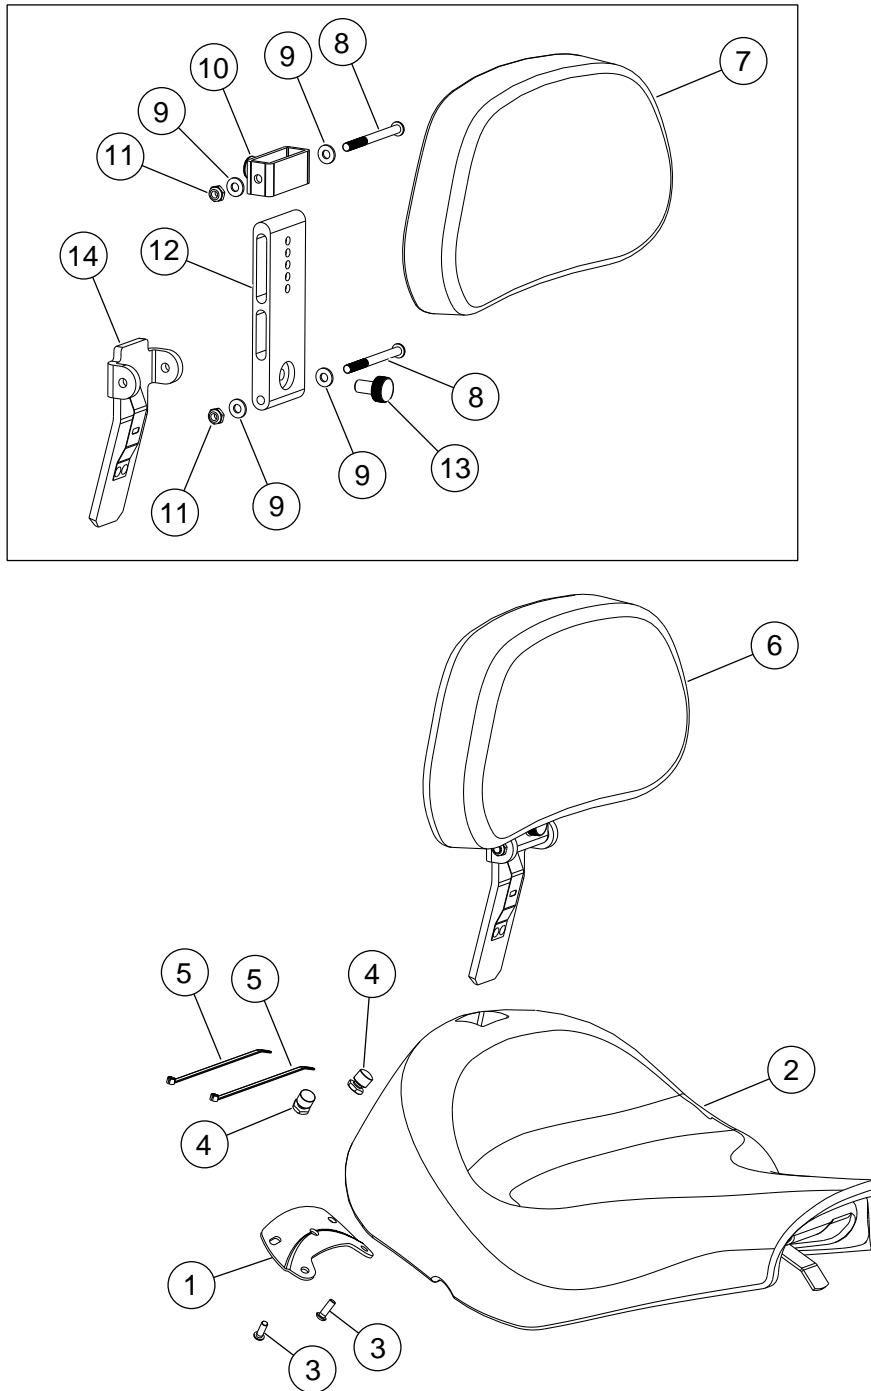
Service Parts: Seat With Adjustable Rider Backrest
